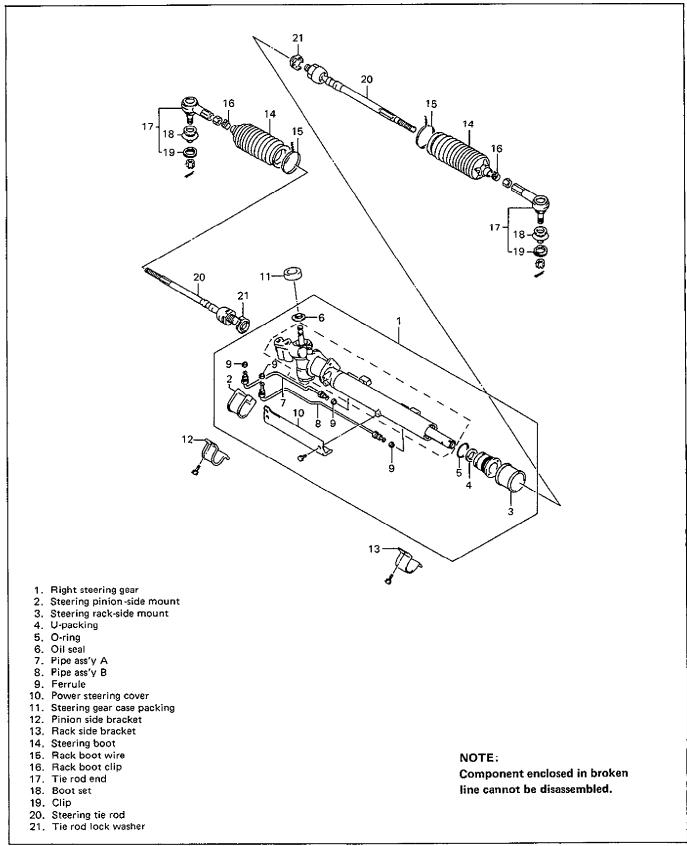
B1-34 Exploded View of Power Steering Gear Box
